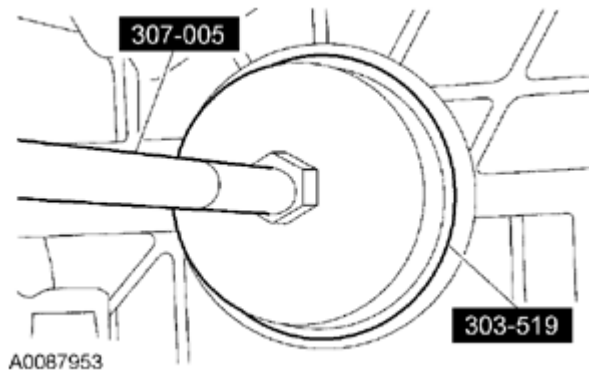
Removing Crankshaft Rear Oil Seal Using Slide Hammer And Crankshaft Rear Oil Seal Remover
